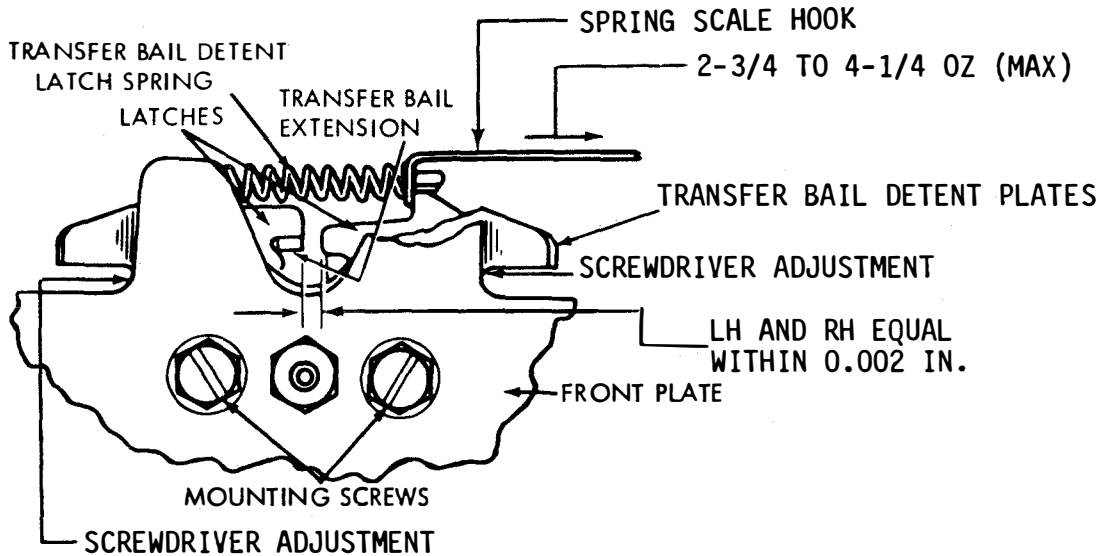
Transfer Bail Detent Plate and Detent Latch Spring
